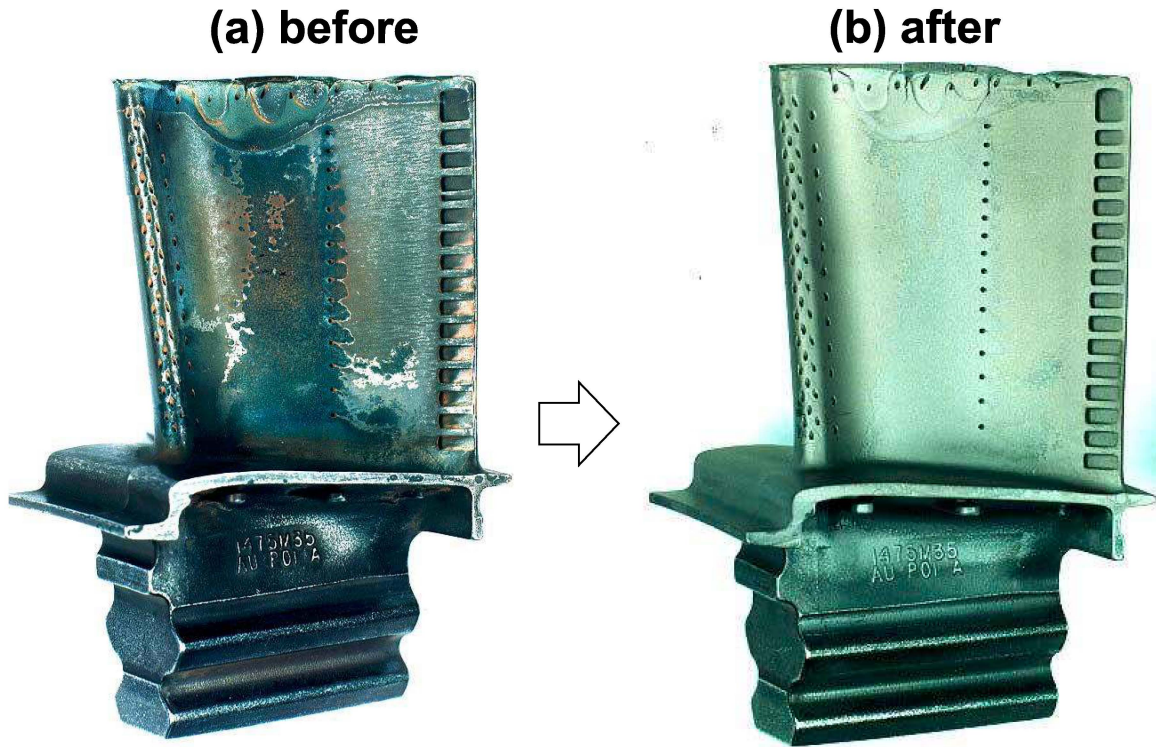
Photographs of an engine run CFM56-3 high pressure turbine blade with hot corrosion before (a) and after (b) processing through GE's proprietary corrosion removal process [7].
